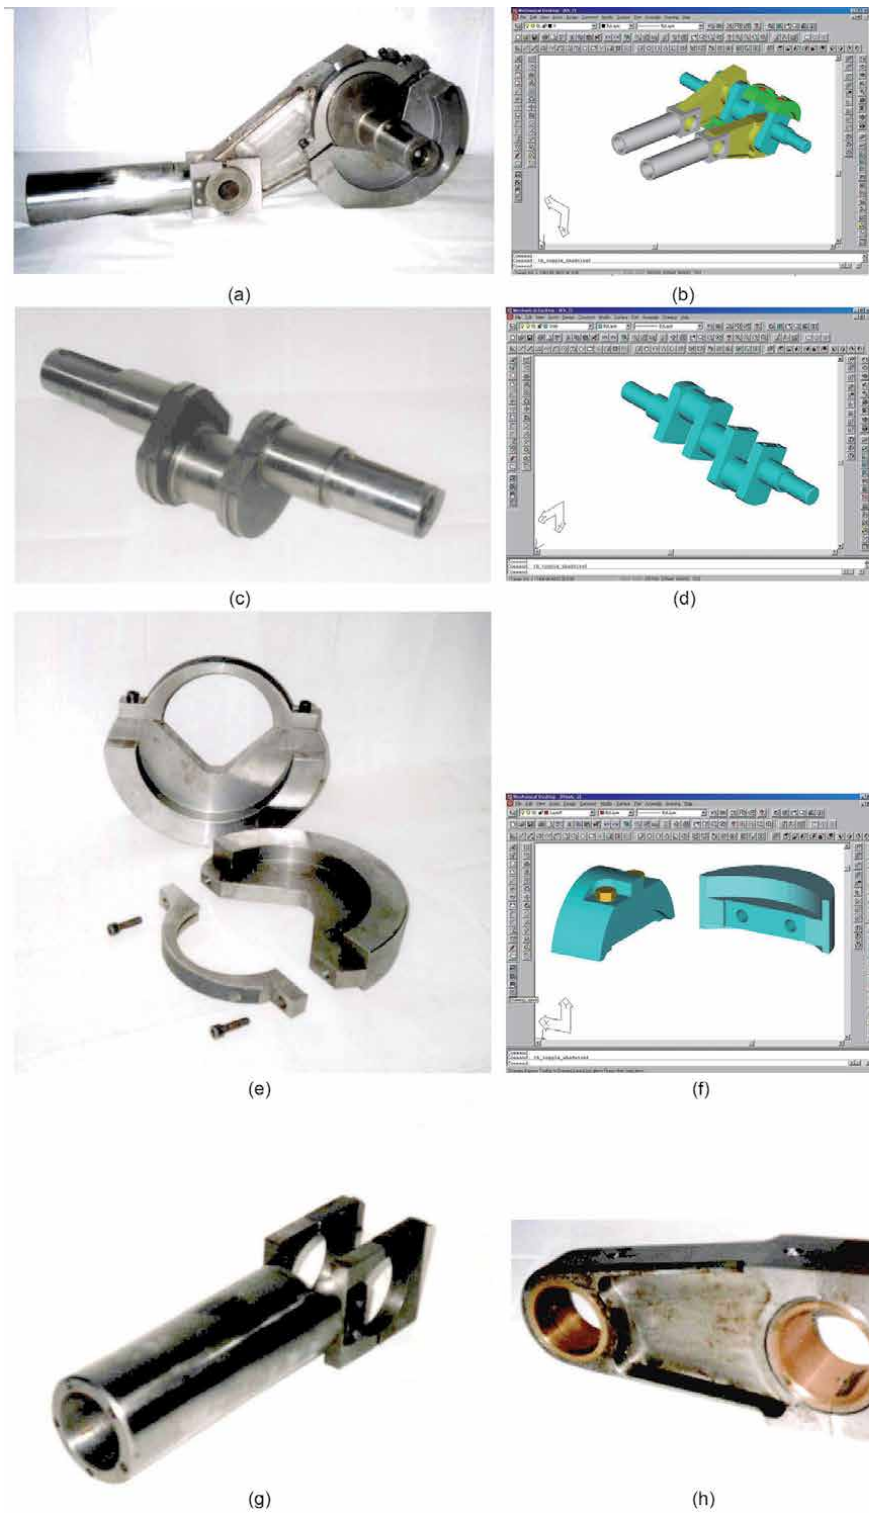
Selection of parts for modular conception of a press. (a) Crank gear of single-chamber briquetting press BZ 50-250, (b) crank gear of dual-chamber briquetting press 2BZ 50-500. (c) Crank shaft of single-chamber briquetting press BZ 50-250, (d) crank shaft of dual-chamber briquetting press 2BZ 50-500, (e) counterweight of single-chamber briquetting press BZ 50-250, (f) counterweight of dual-chamber briquetting press 2BZ 50-500, (g) crusader – usable in both versions and (h) connecting rod.
